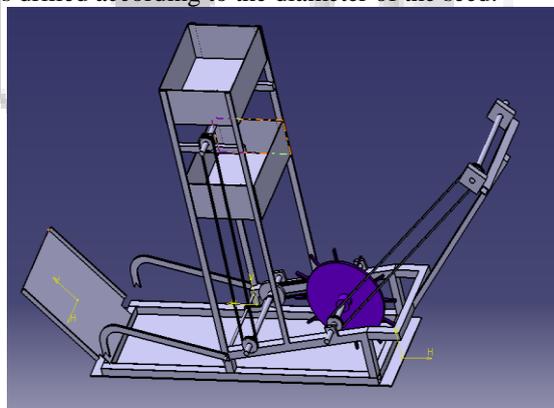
CAD Model of Seed Sowing and Planting Machine
